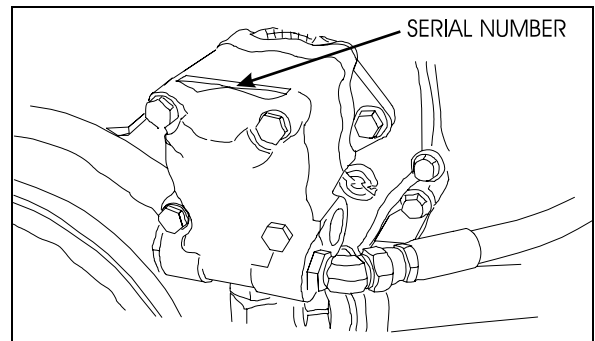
POWER STEERING PUMP SERIAL NUMBER 00035
